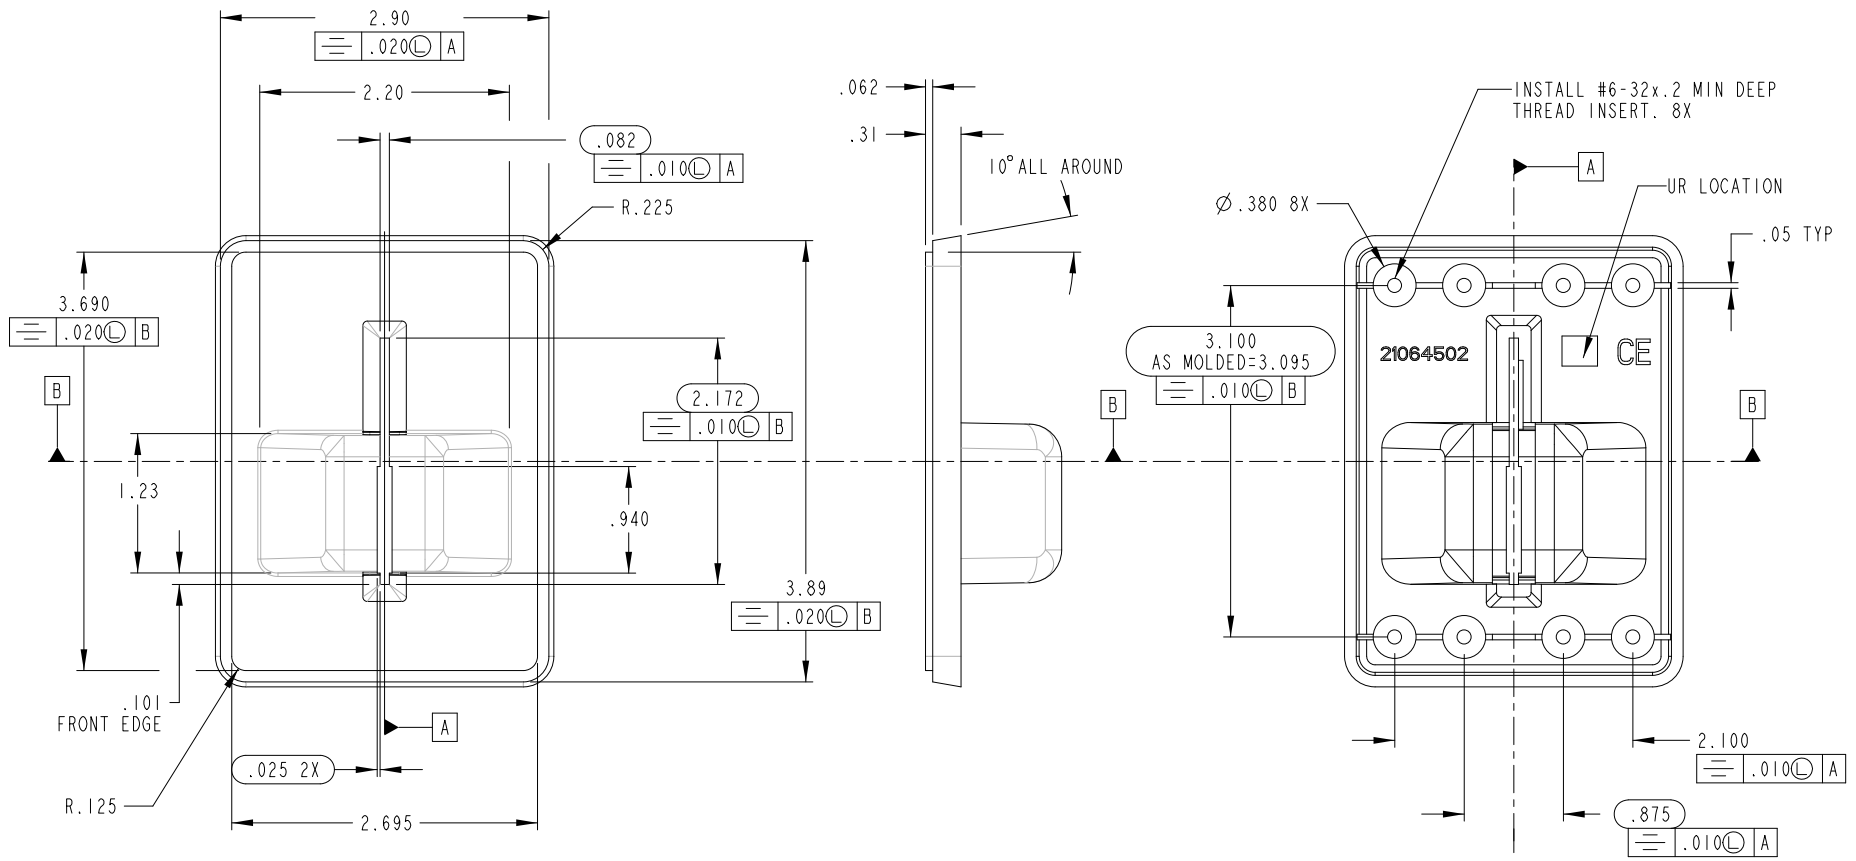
Dimensions for Flat-Faced Bezel Design Sheet 1
